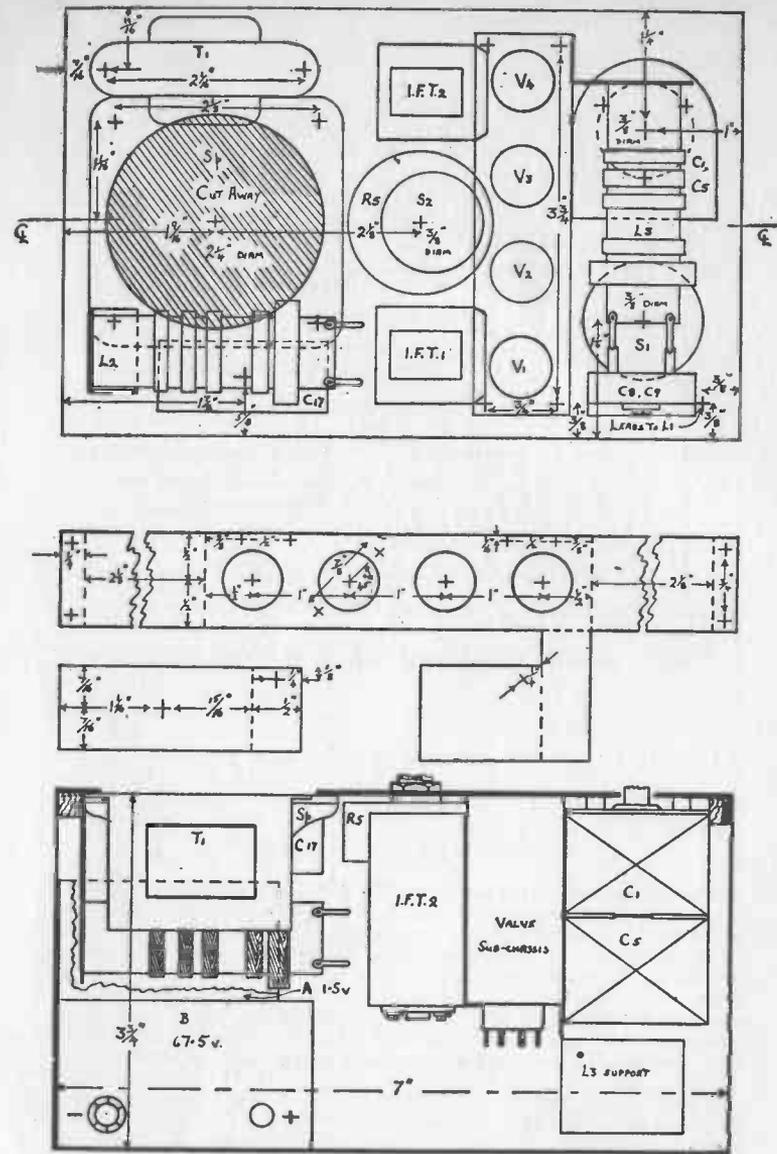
Panel Dimensions, Bracket, Sub-Chassis and Side Constructional View of the "Two-Band Super"
